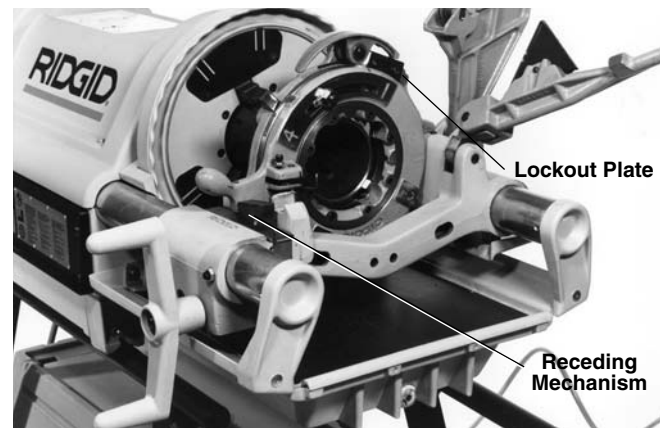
Positioning Lockout Plate for NPT/BSPT Taper Threads
